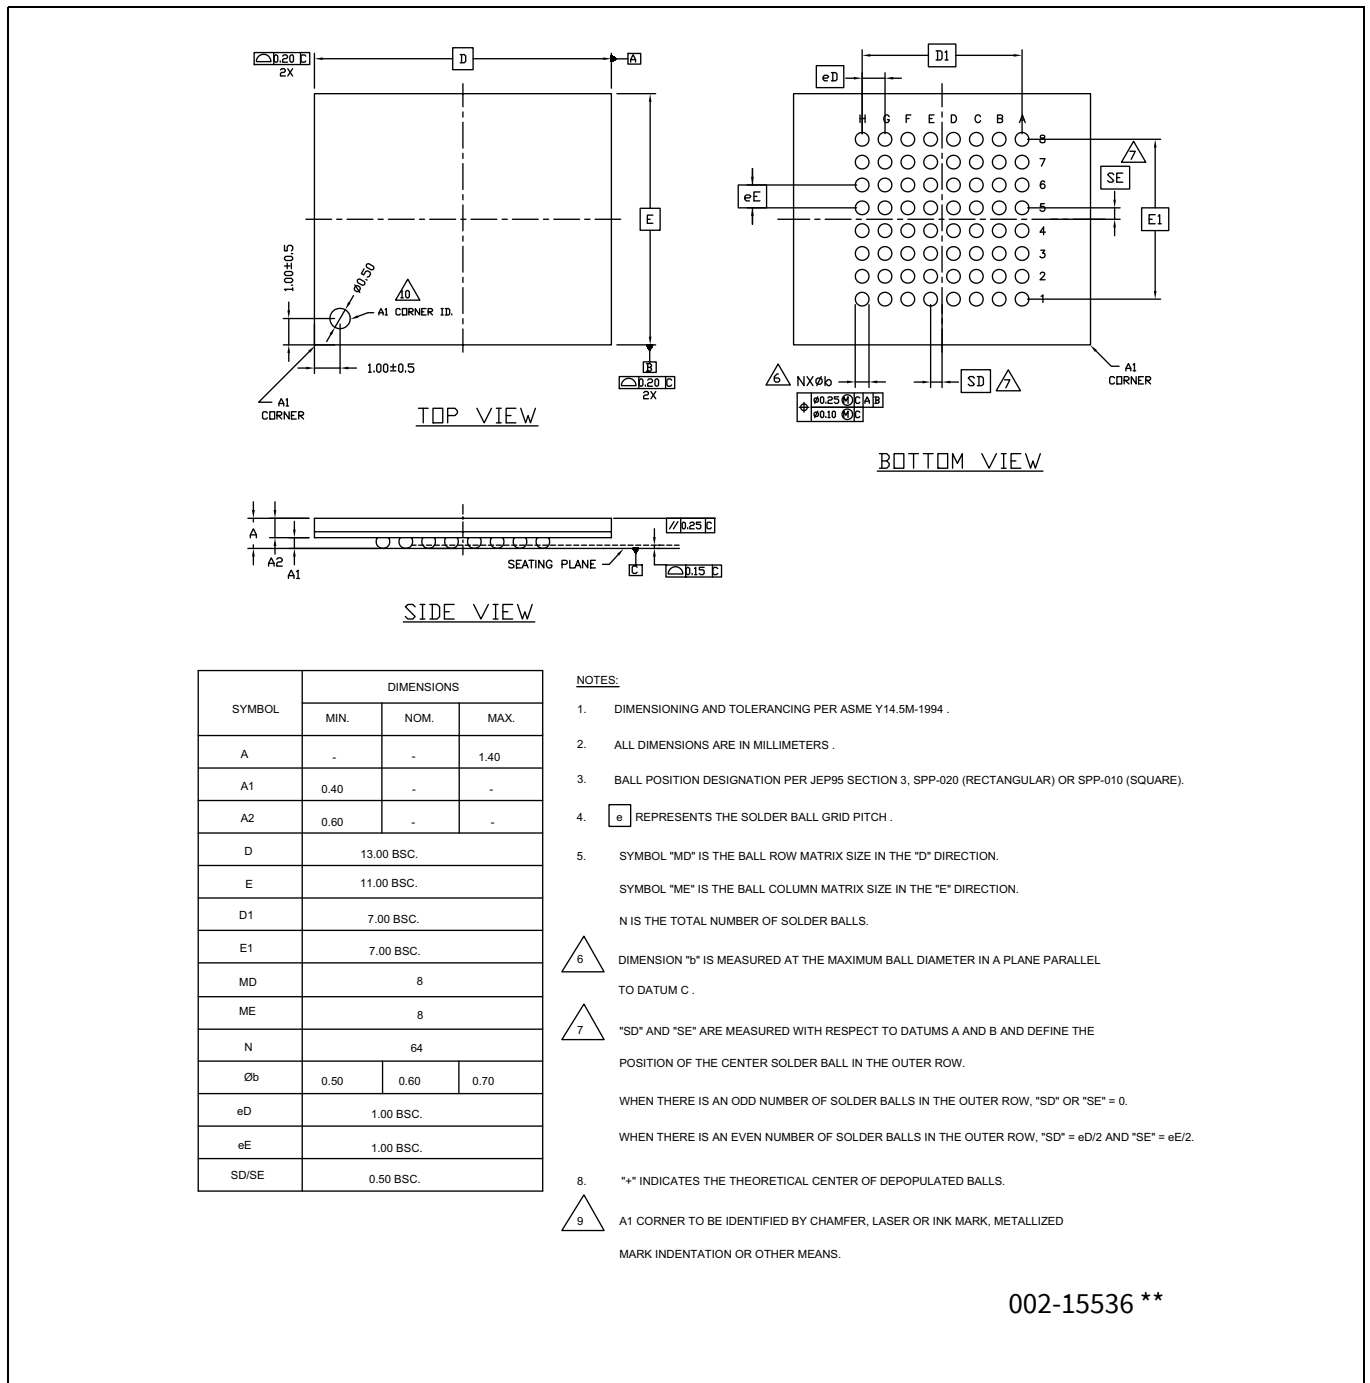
64-ball FBGA (13.0 × 11.0 × 1.4 mm) package outline, 002-15536
